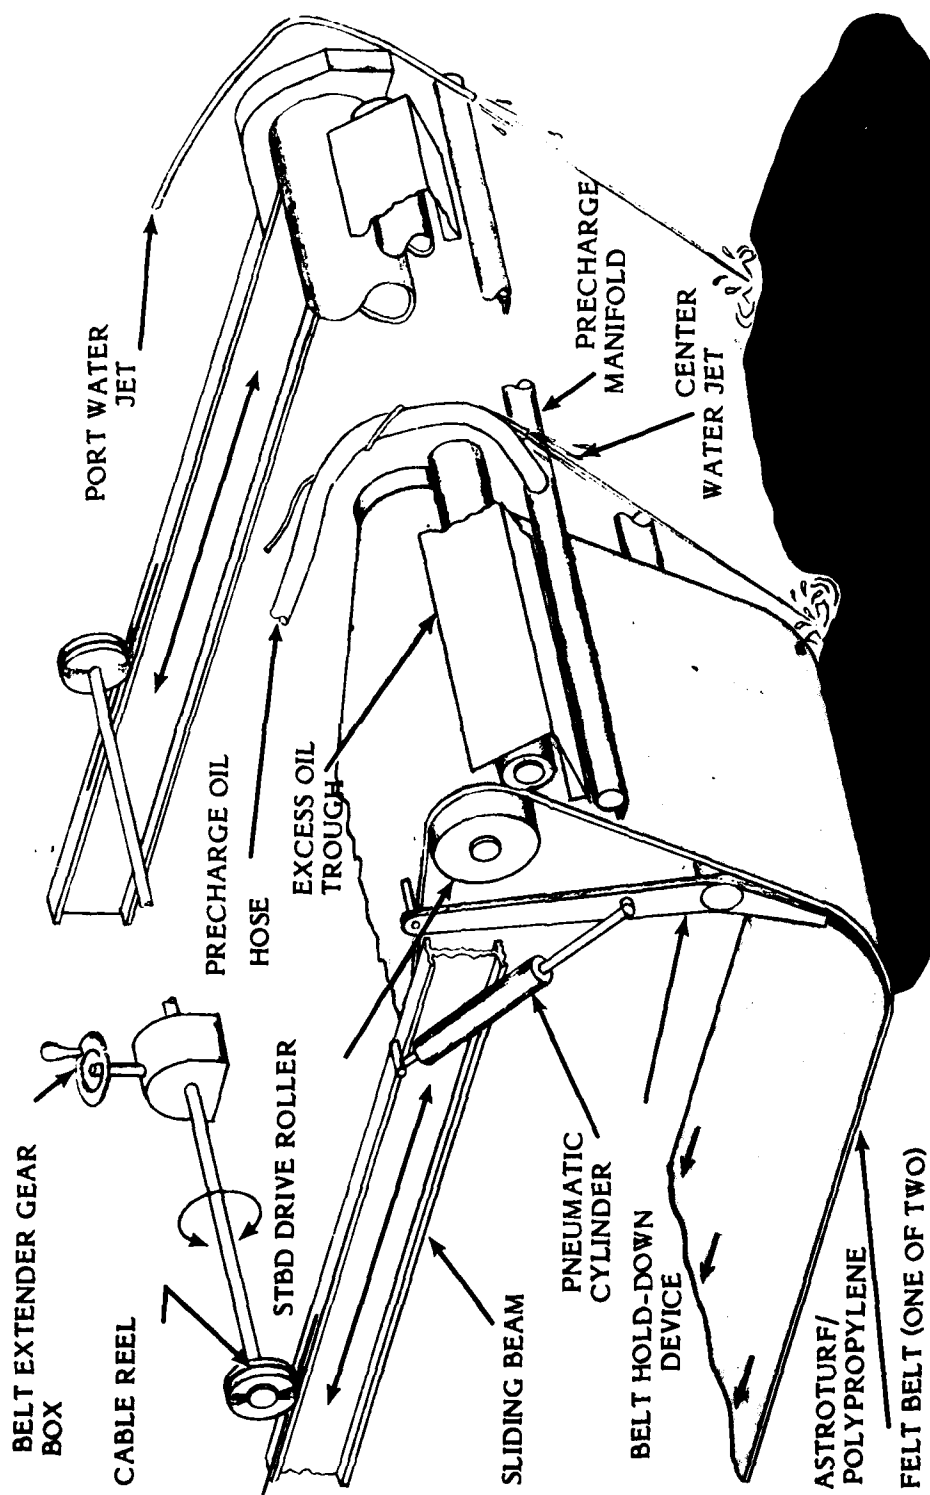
CUTAWAY VIEW OF THE FORWARD END OF CENTER SECTION OF THE USCG ZRV SKIMMER.
